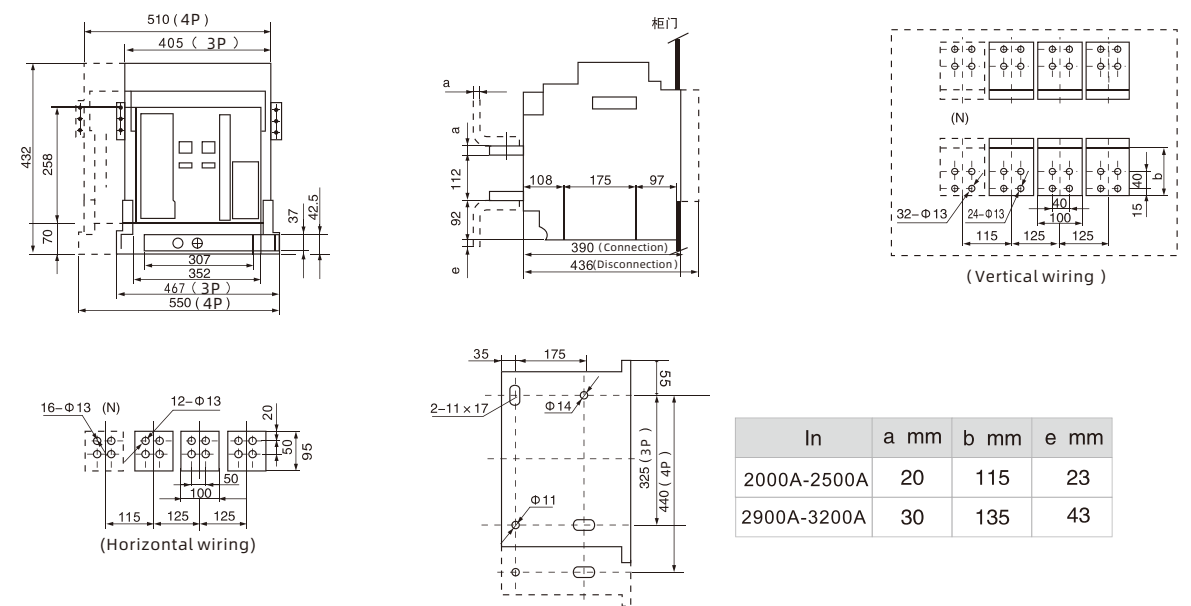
Draw-out circuit breaker overall and installation dimensions (ARW1-3200, 3200/4)
